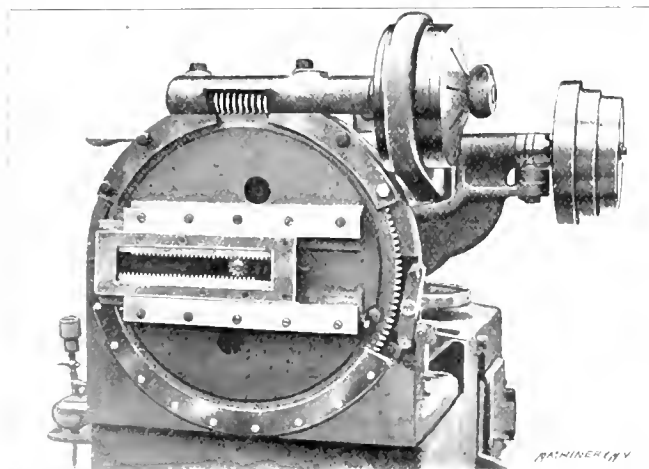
View of the Work Head showing the Slide for Linear Motion.
